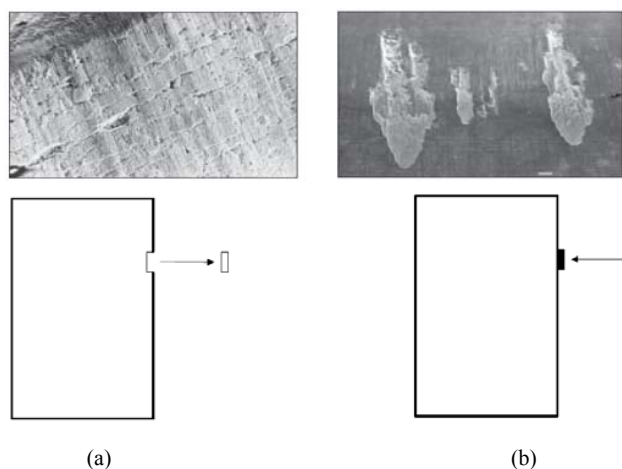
(a) Adhesive wear, pieces pulled out of the tool surface by the work material, (b) Galling, pieces transferred to the tool surface from the work material
